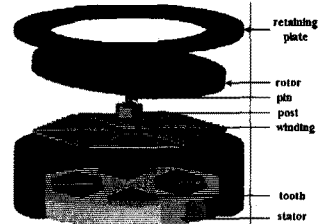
Exploded view of axial air-gap type magnetostatic wobble motor
